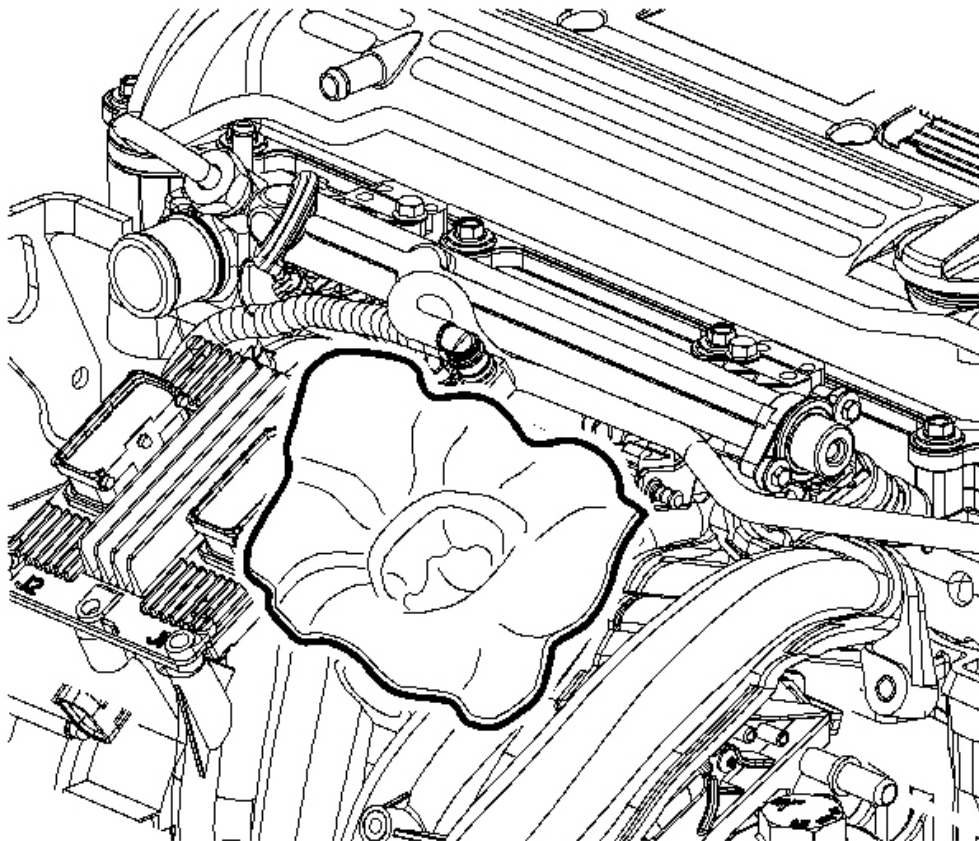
Removing Shop Towel From The Throttle Body Opening
